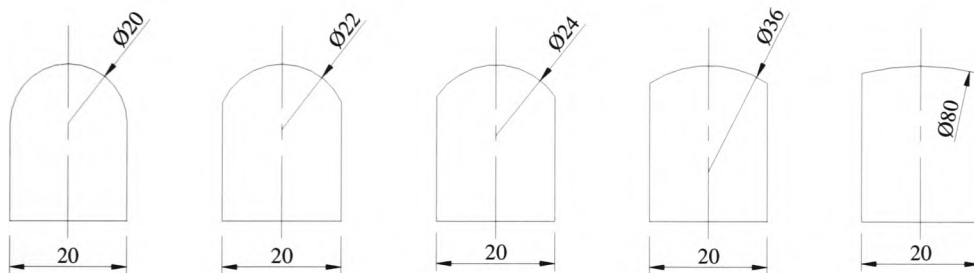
Dimensions (in mm) of impactor hammer heads
